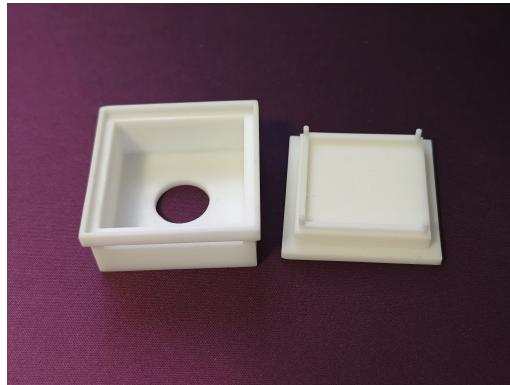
3D-printed protective enclosure for the IMX291 camera module.
